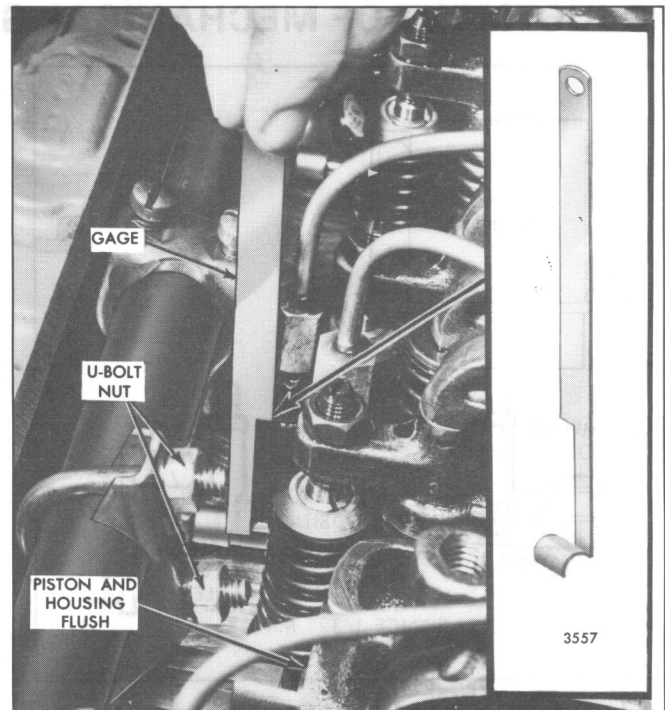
Adjusting Throttle Delay Cylinder (Former)
